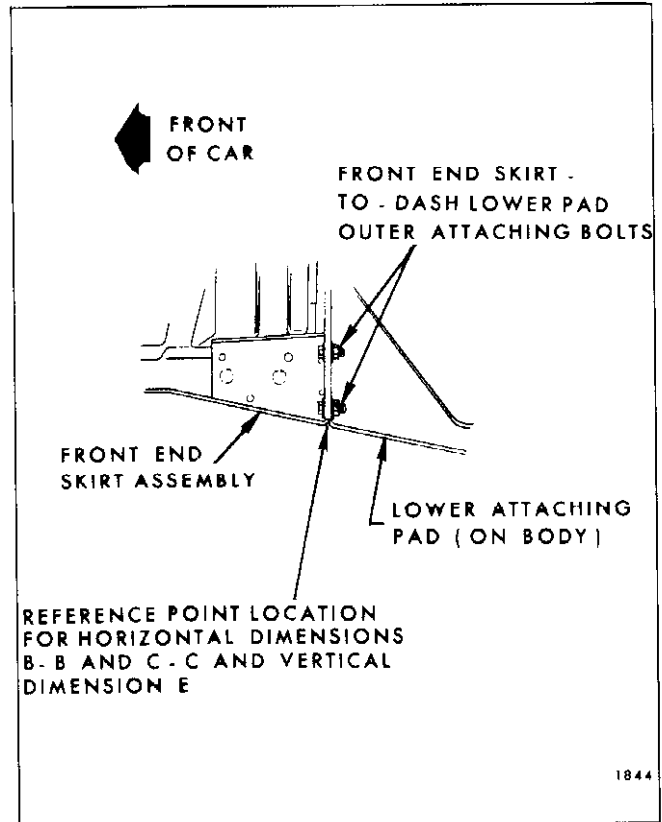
Front End Skirt-to-Dash Lower Attaching Pad
